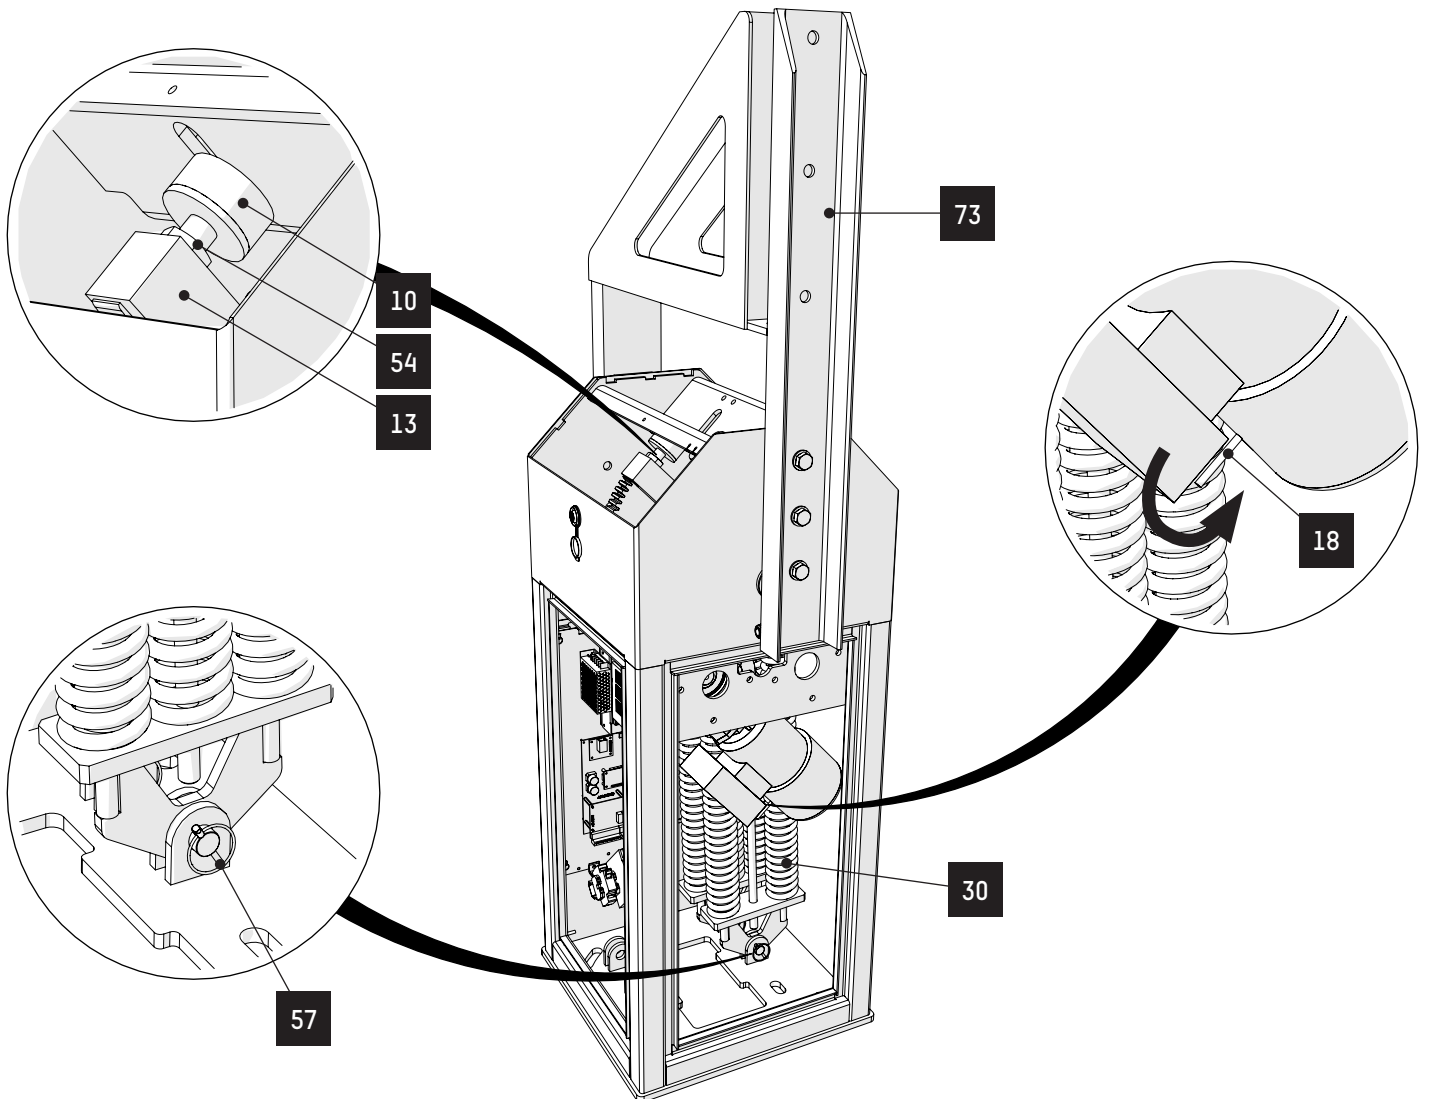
Assembly of the arm with a fixed bar for BL47 - Switching off of the spring(s)
